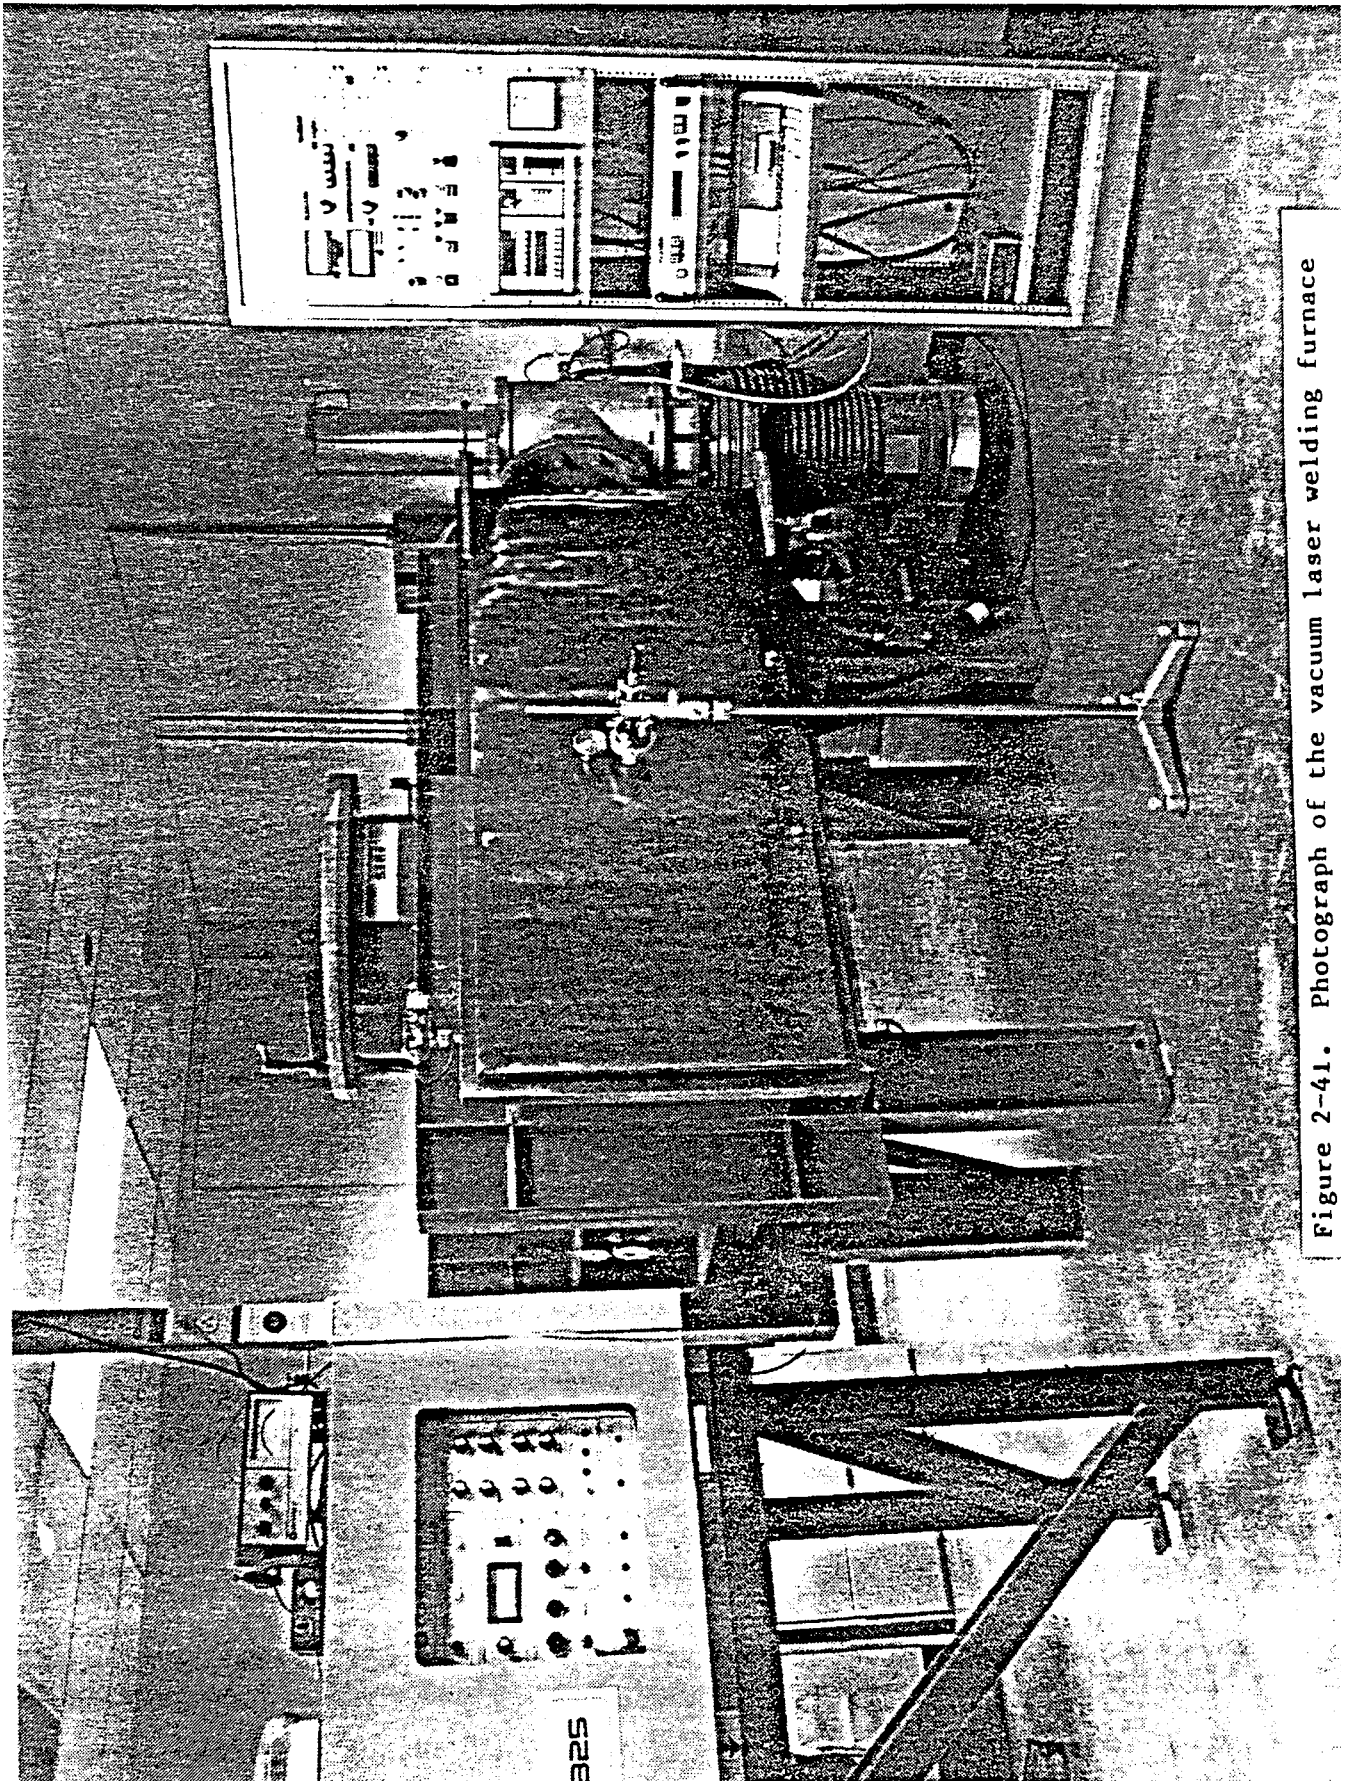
Photograph of the vacuum laser welding furnace
